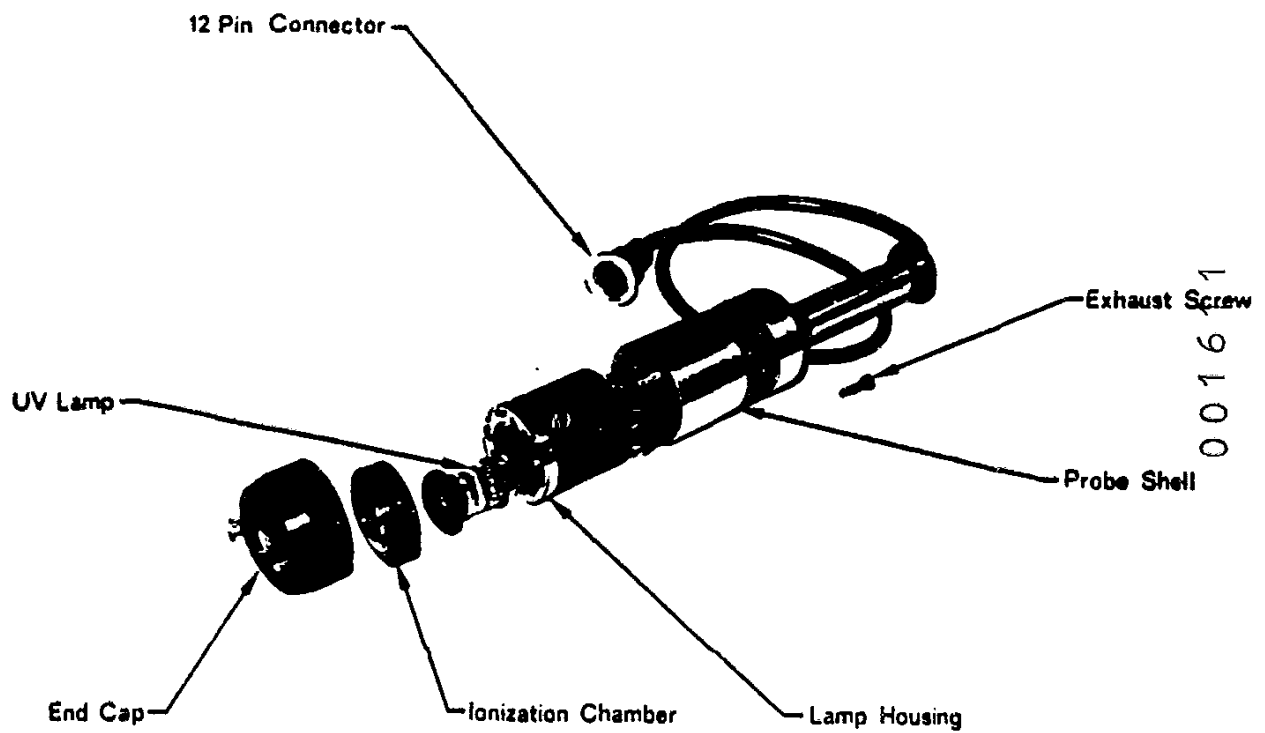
COMPONENT PARTS OF THE hNu PROBE ASSEMBLY
